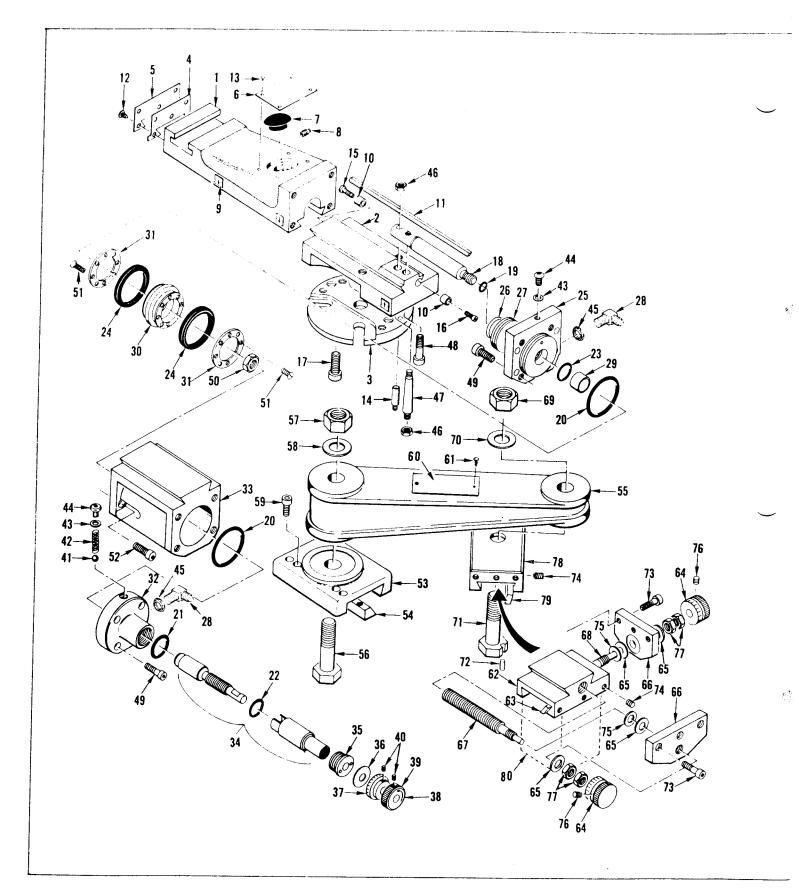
Exploded View of Mark IV Series Lathe Tracer Attachment and. . .
